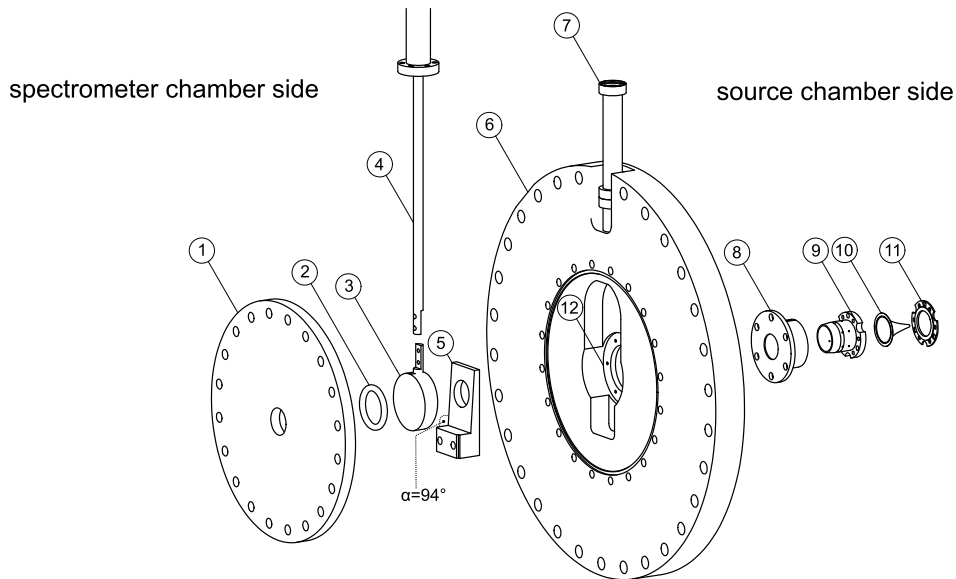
Exploded view of the gate valve. The beveled sealing flange (3) is moved vertically up and down by the linear feedthrough (4) and is pressed against a Viton O-ring (2) by the wedge clamp (5). The skimmer mounting flange (8) is screwed on the 300 CF flange (6) at position (12). It contains the skimmer pedestal (9) with the skimmer (10) mounted on it.
